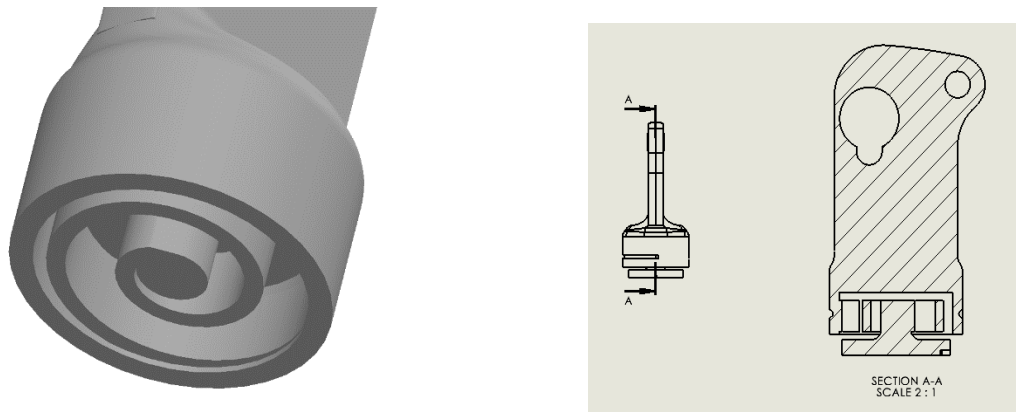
Left to right: (a) Spiral CAD, (b) Sectional cut view of finger base pivot
